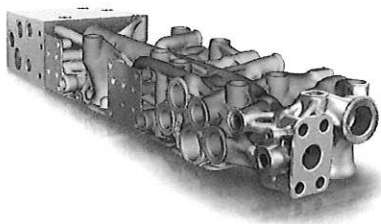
Shape optimized and additively manufacturable hydraulic valve
